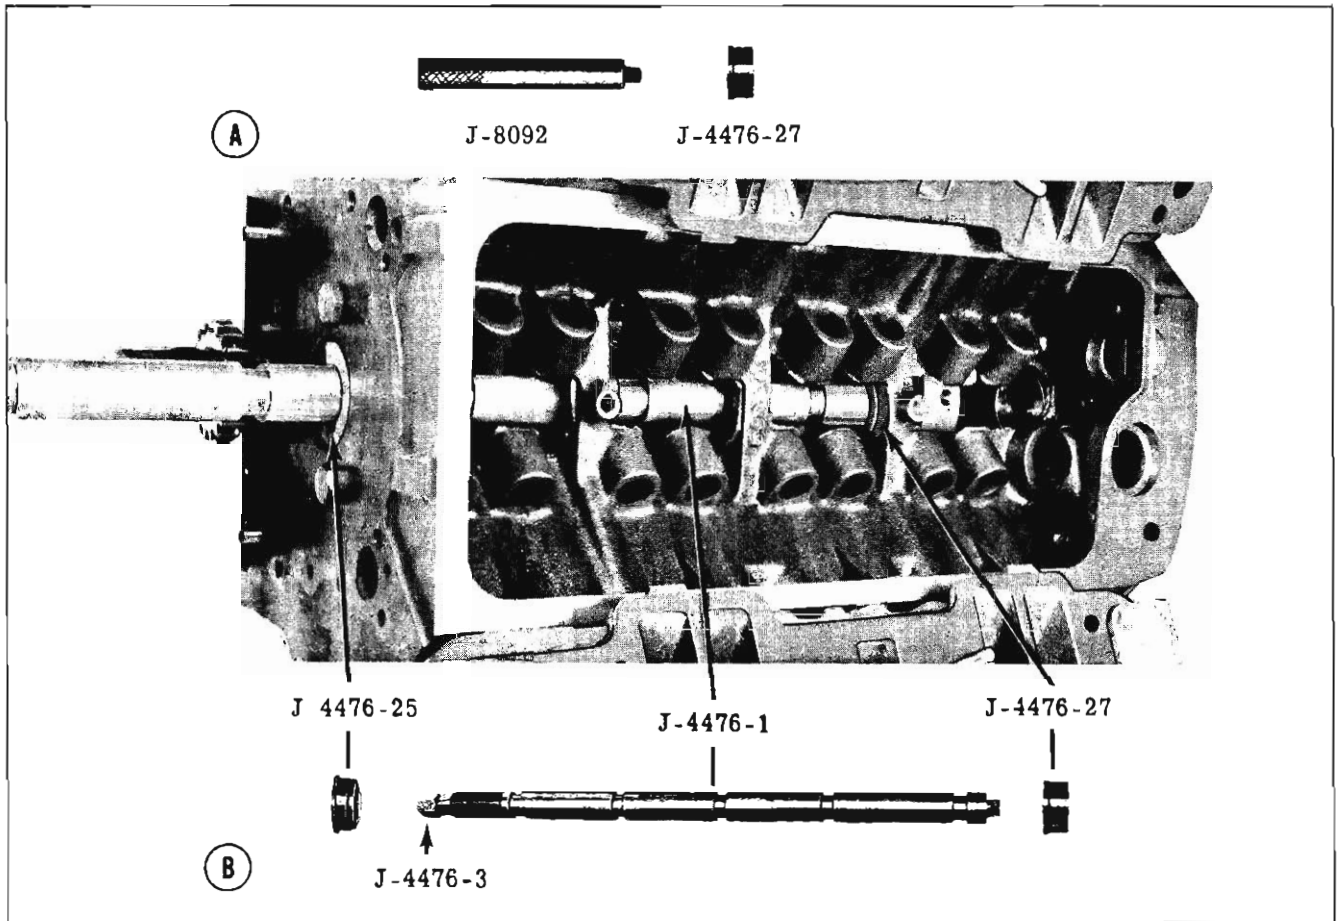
Removing No. 4 Camshaft Bearing (Typical of 1, 2 & 3)
